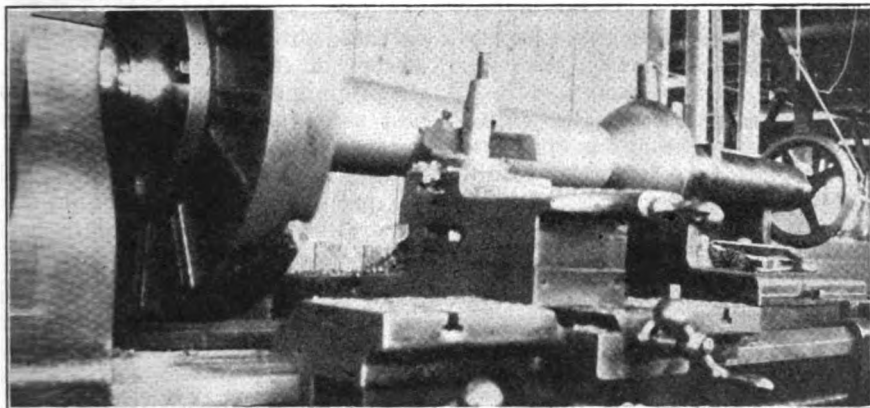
ANOTHER VIEW OF THE ARRANGEMENT USED FOR TESTING THE TOOLS
